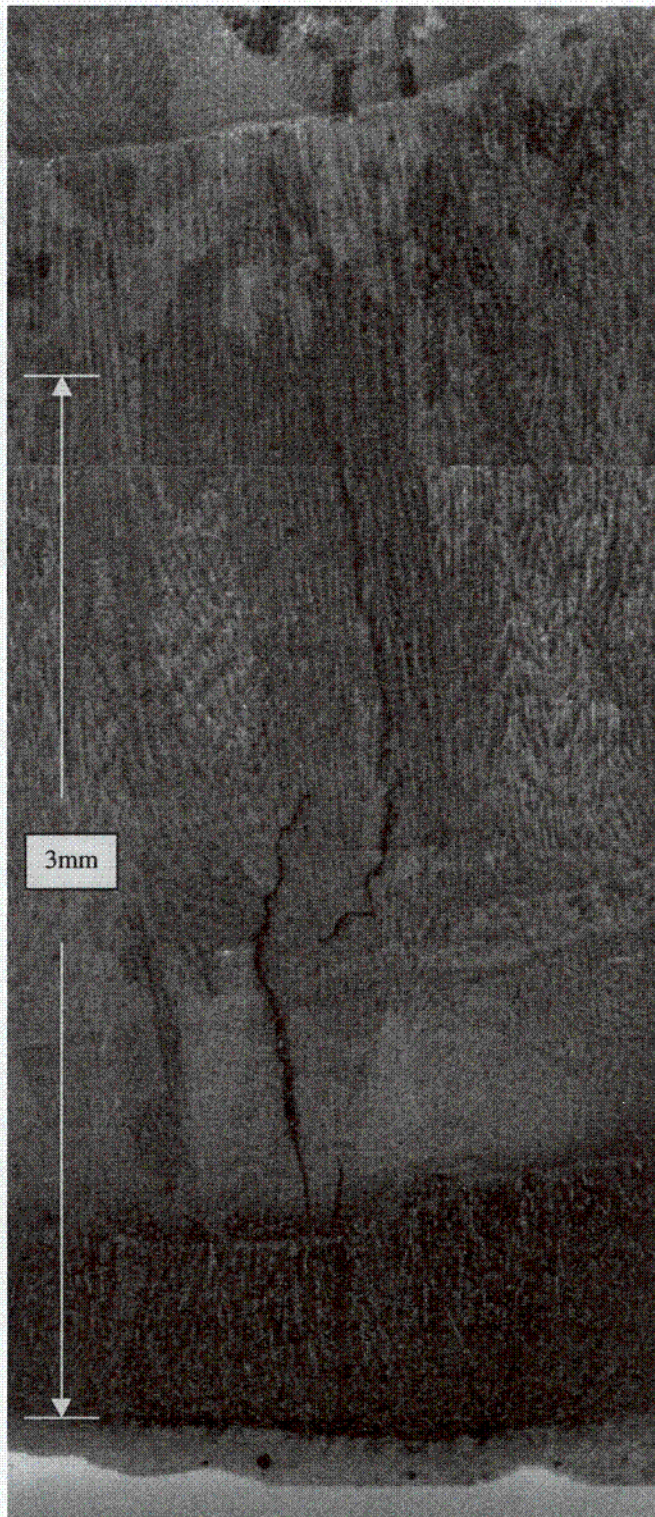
Micrograph of Crack in Flawed Weld Bead, Near Surface Zone of PVRUF
